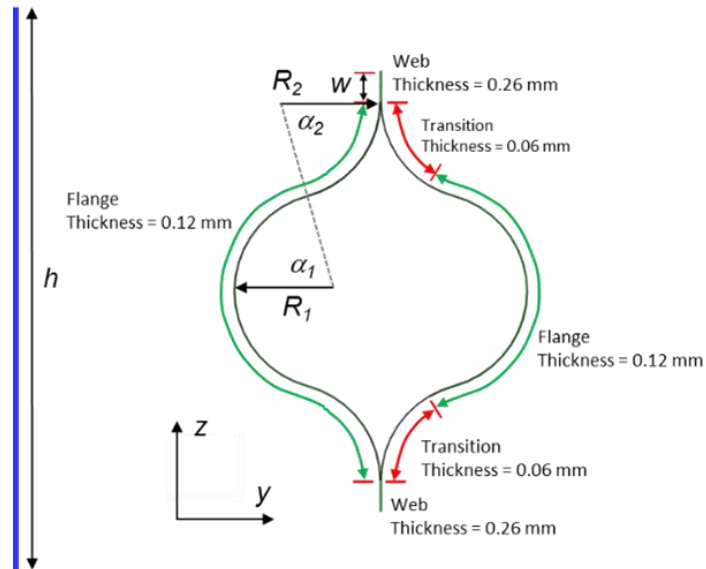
ACS3 deployable composite boom cross-section and laminate details. When flattened for rolling, the ACS3 boom cross-section is approximately 65 mm high (dimension h). The deployed cross-section is approximately 50 mm high by 33 mm wide when fully developed. Ply drop-offs (red) are used on the inner shell laminate (compressed side when rolled) to improve boom rolling tolerance.
